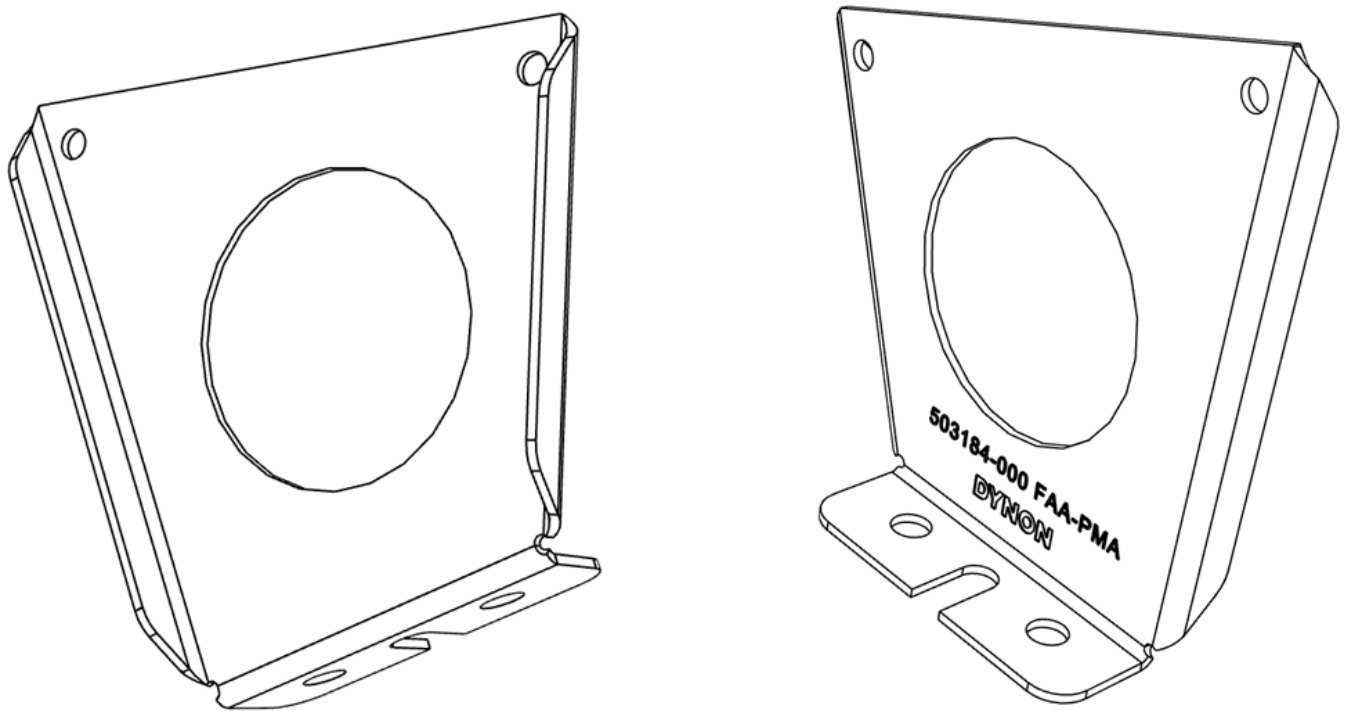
Cessna 172 Fuel Flow Sensor Mounting Bracket, 503184-000
